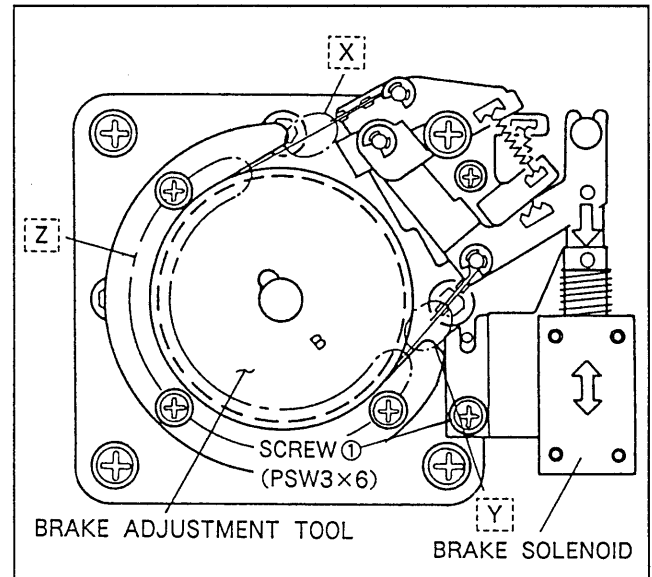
Solenoid Assembly Position Adjustment
